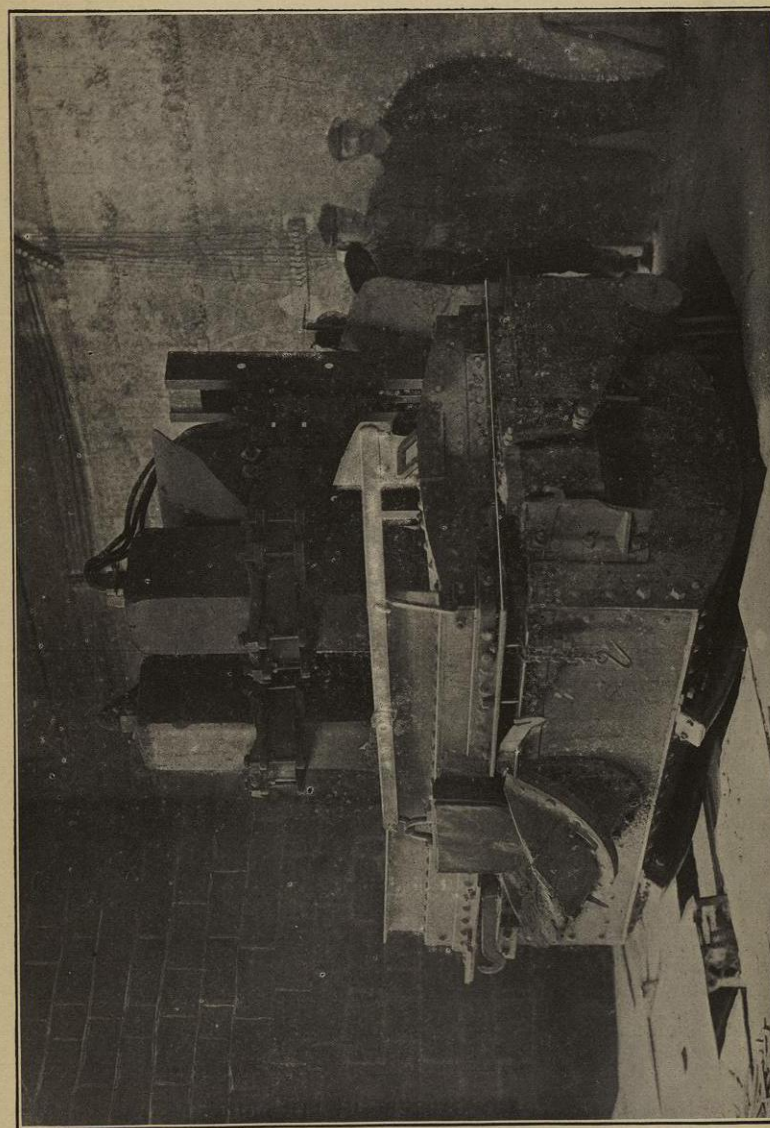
Heroult 3,000-kg. Furnace (early design).
